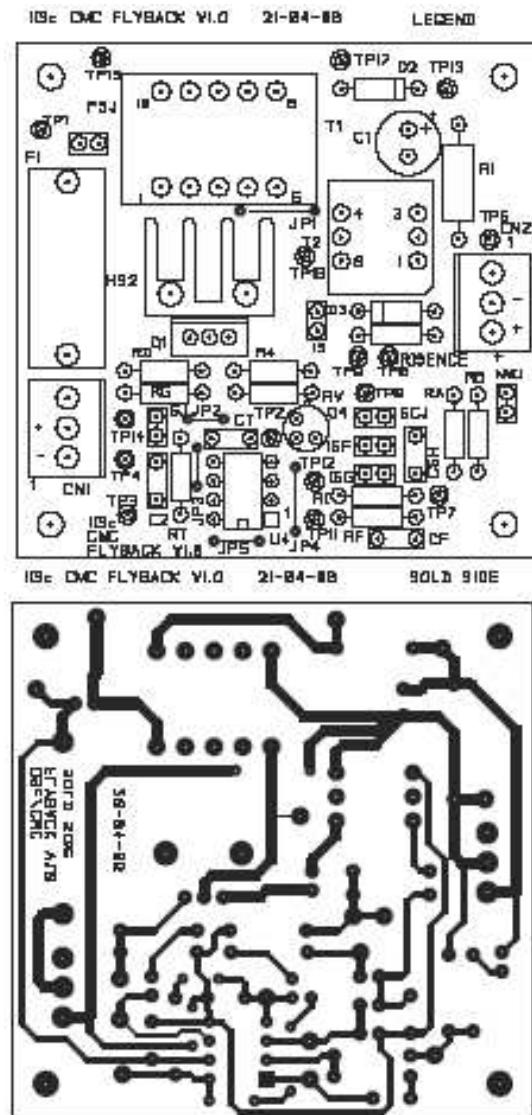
Solder and Component Side of CMC-Flyback Converter
